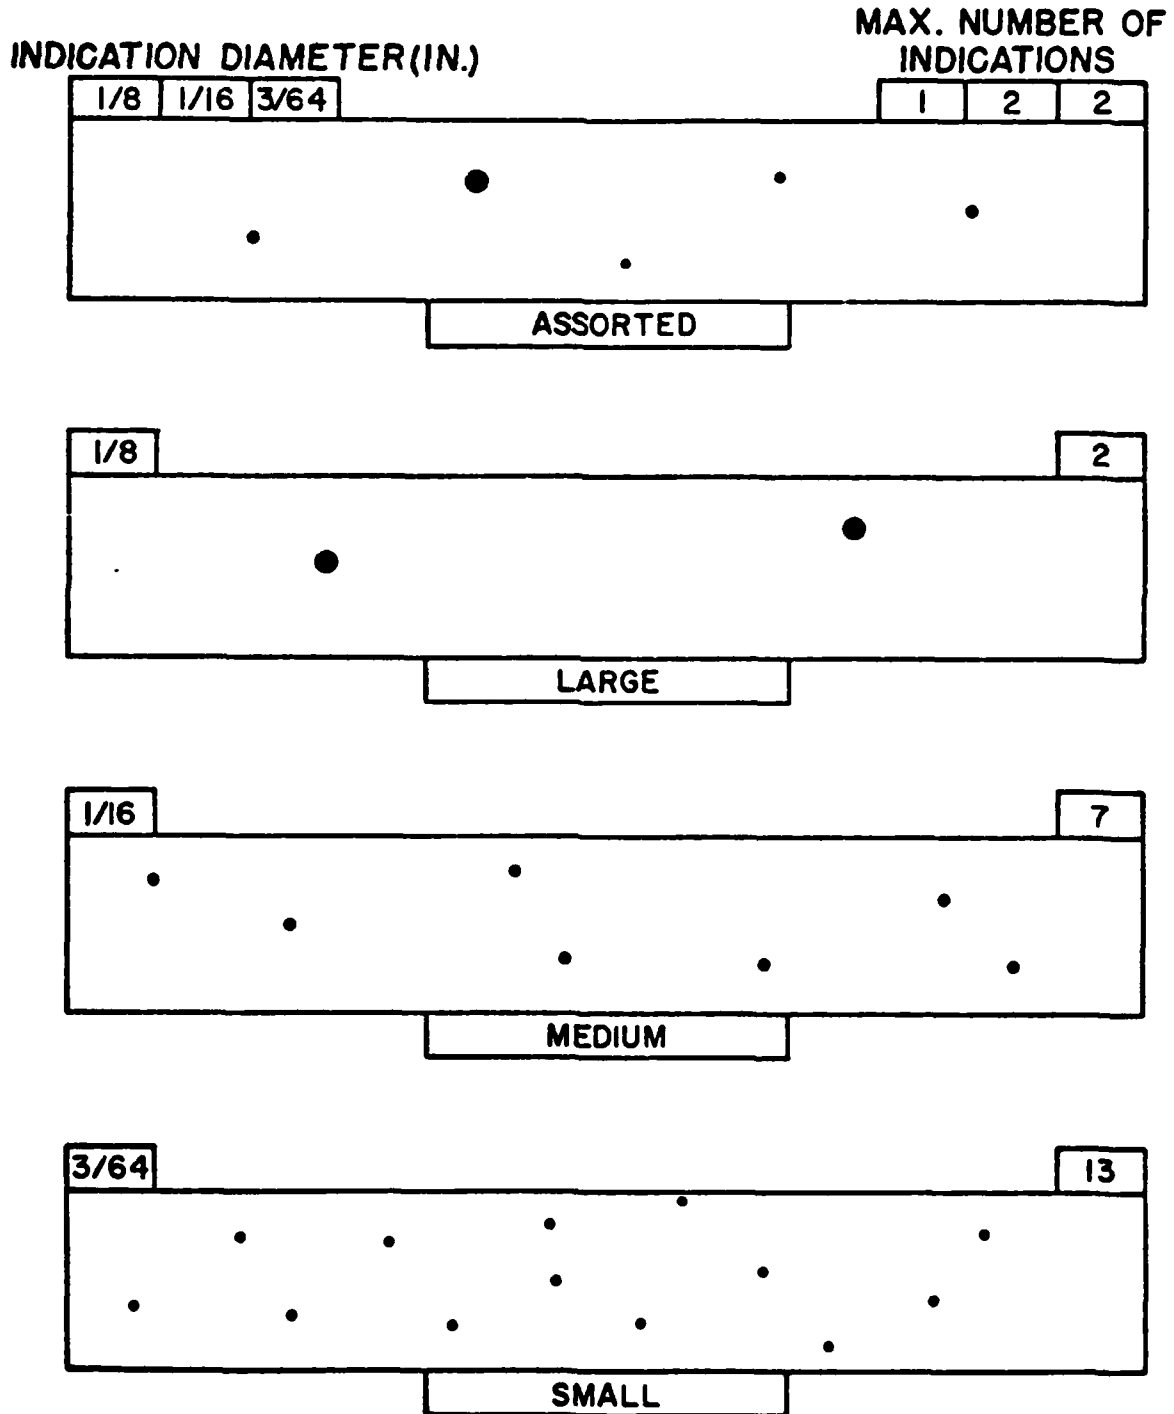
Class 1 Weld Surface Inspection Standard for Scattered Rounded or Non-Linear Indications (Sheet 6 of 6).
